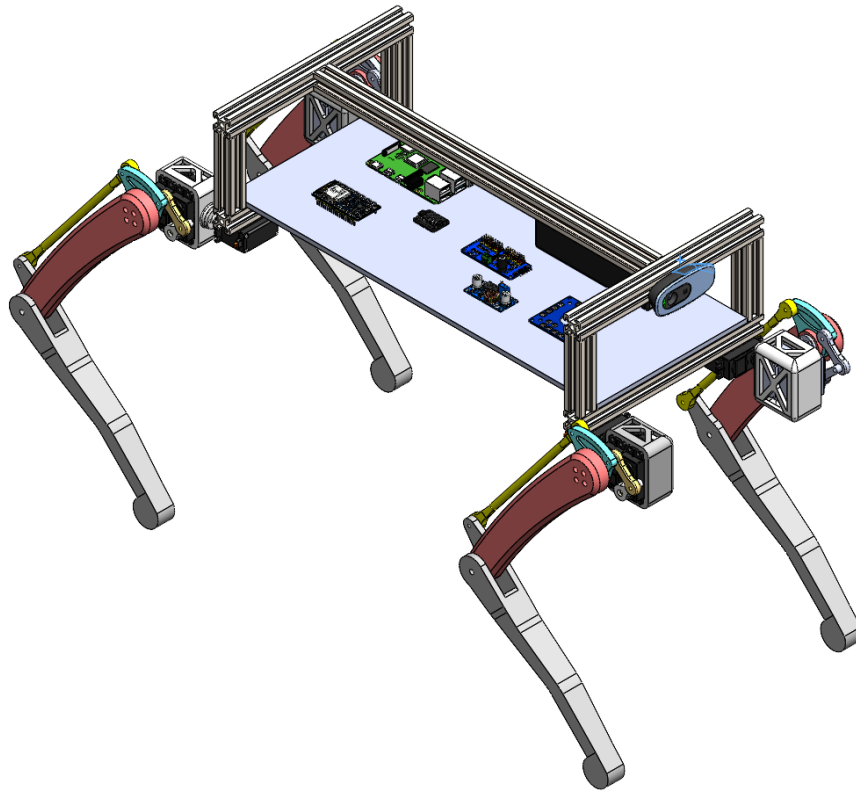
Complete Robot Dog Assembly - Isometric View
